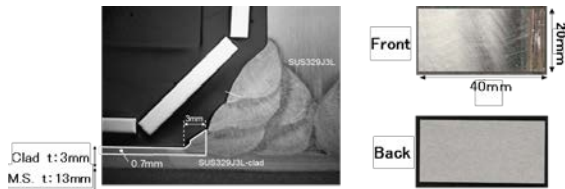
Cut-off plan of test piece for pitting corrosion resistance test
